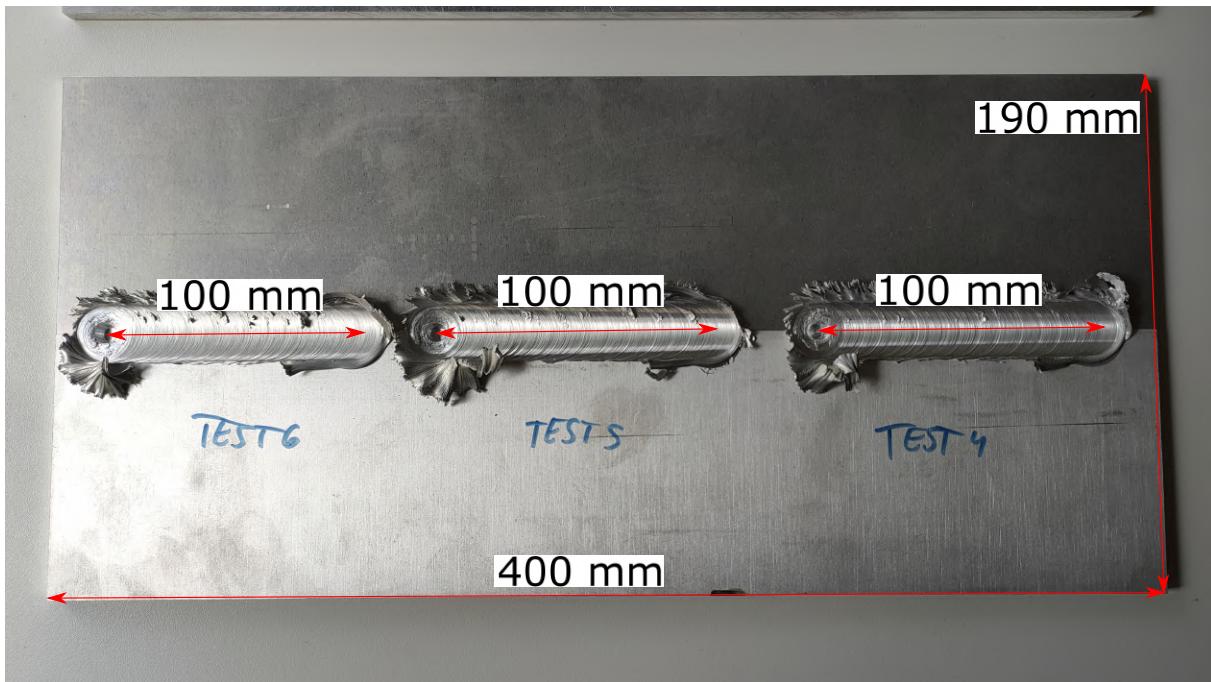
Example of three 100 mm welds performed on a dissimilar AA6061-AA7075 assembly. The welds exhibit excessive amount of flash. The caption "Test" alongside each weld indicates that they were manufactured as the experimental plan was established.
